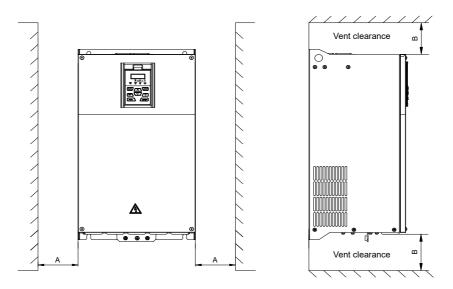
Minimum mounting clearances of GK820-4T45D(H) and above
